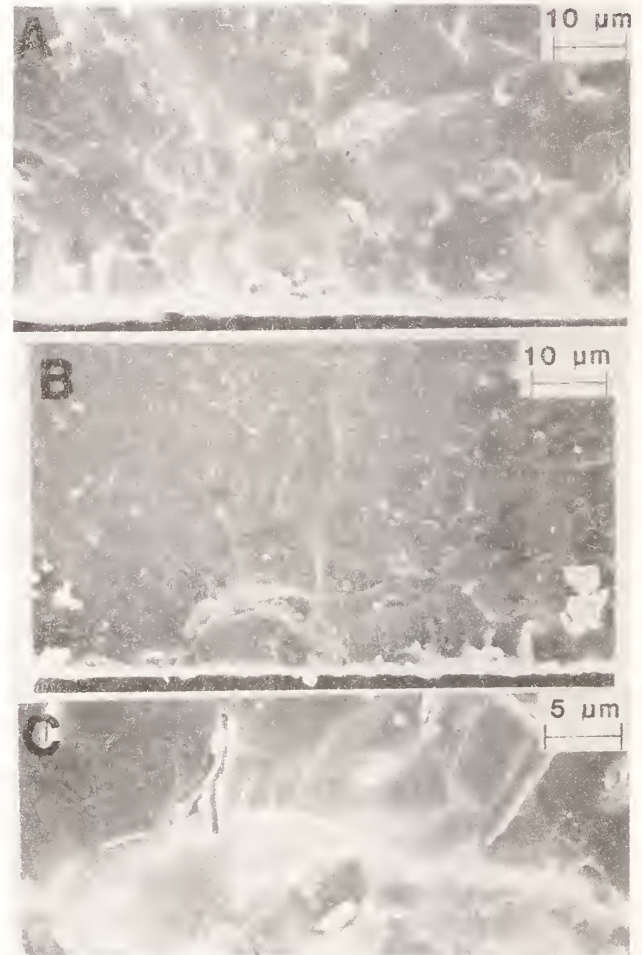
Samples of machining flaws in  $\text{B}_4\text{C}$ . Representative SEM photos of machining flaws causing failure in test bars (typically approximately the bottom center of the photograph). The samples, their failure stresses and the fracture toughnesses calculated from their failure stress and flaws are as follows: A) Carborundum, 370 MPa,  $K_{IC} \sim 1.8 \text{ MPa m}^{1/2}$ ; B) Union Carbide heat treated, 266 MPa,  $K_{IC} \sim 1.7 \text{ MPa m}^{1/2}$ ; C) ESK, 354 MPa,  $K_{IC} \sim 4 \text{ MPa m}^{1/2}$ . All samples represent failure from flaws from machining perpendicular to the tensile axis. Note the essentially exclusive transgranular failure and that the grain structure is not especially well defined.
